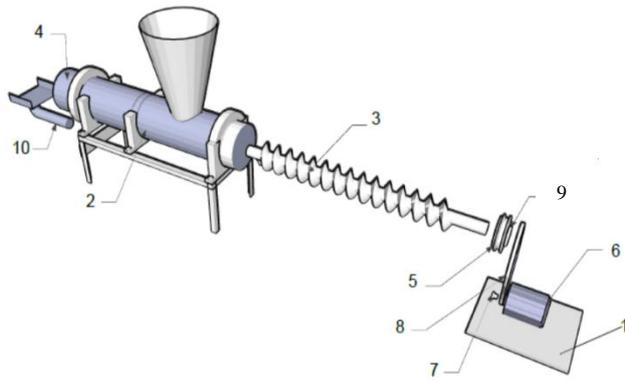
Assembly drawing of the single screw extruder (1-Electric motor seat, 2- Extrusion barrel, 3- Auger, 4- Die head, 5- Pulley, 6- Electric Motor, 7- Motor pulley, 8- Belt drive, 9- Tip, 10- Collector)
